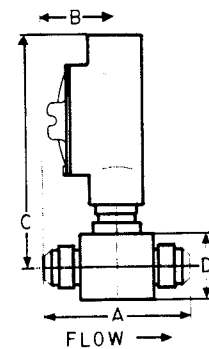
Dimensions - NPT Threaded and MS-33656 Tubing
